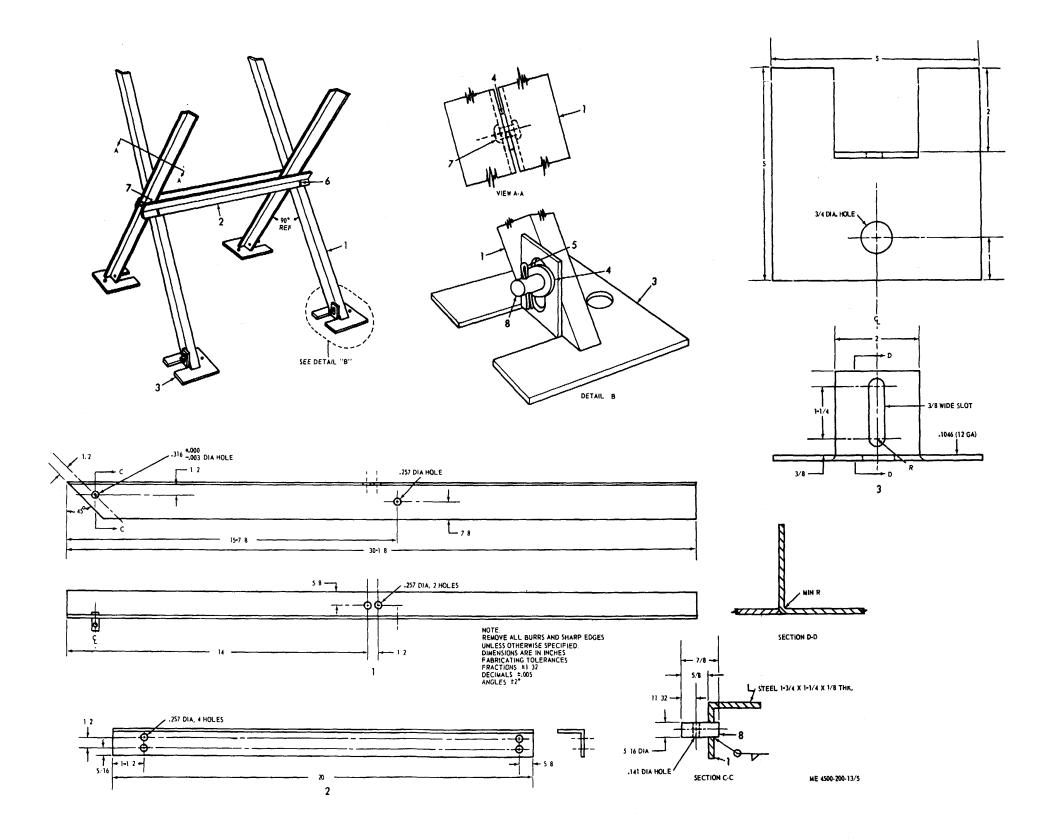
Fabrication and assembly of 55-gallon drum stand, style A.
